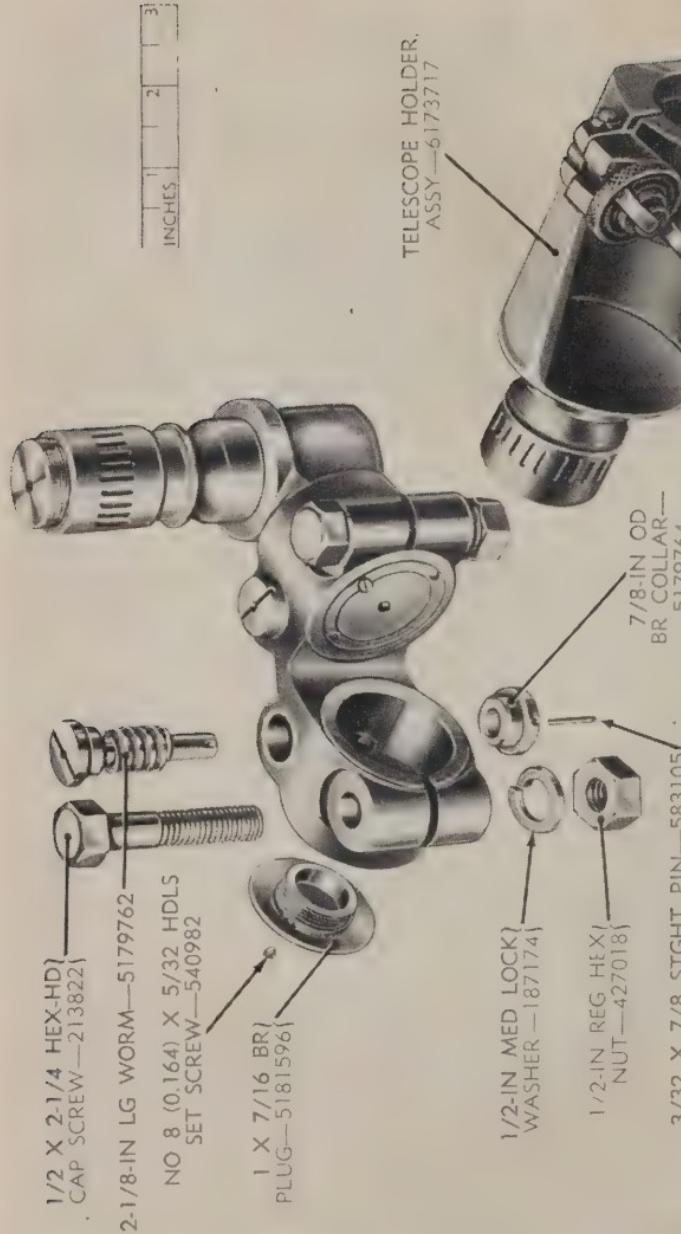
Telescope mount M71—removal of the telescope holder assembly from the telescope holder housing—exploded view.
